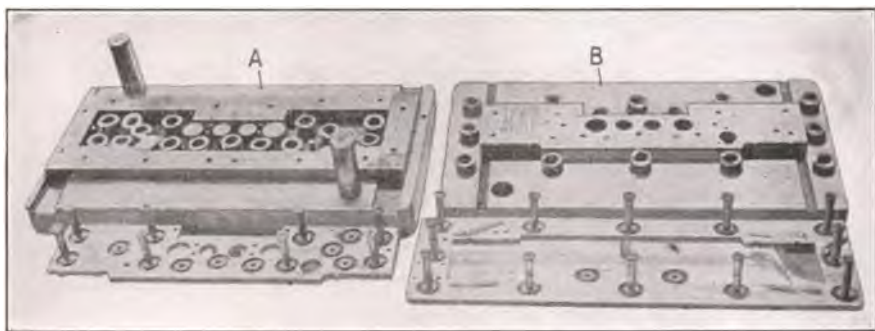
Large compound dies for blanking and piercing a rectangular plate
